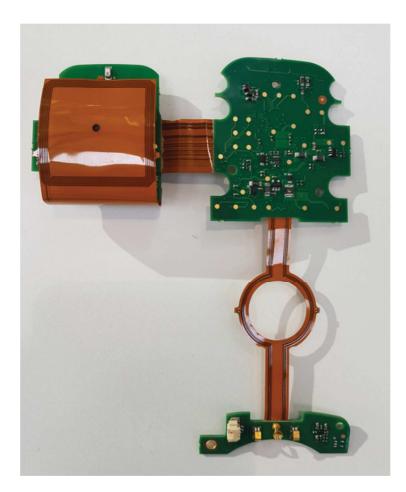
Front view of Radio Module and flexible PCB with radio coil
